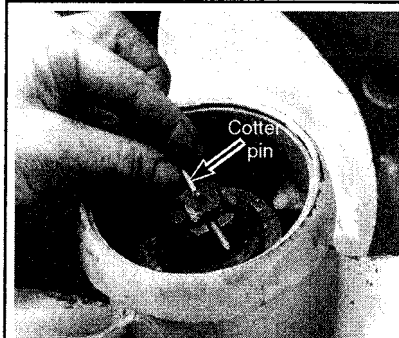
Remove the coter pin, and then the nut keeper (if used), the propeller nut and the splined washer
